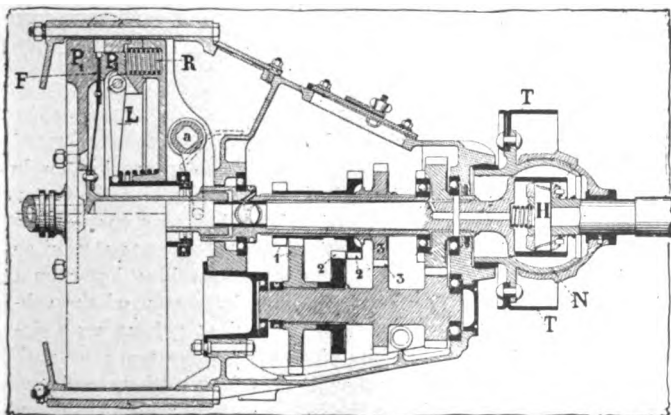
Showing very light Panhard plate clutch F in flywheel
